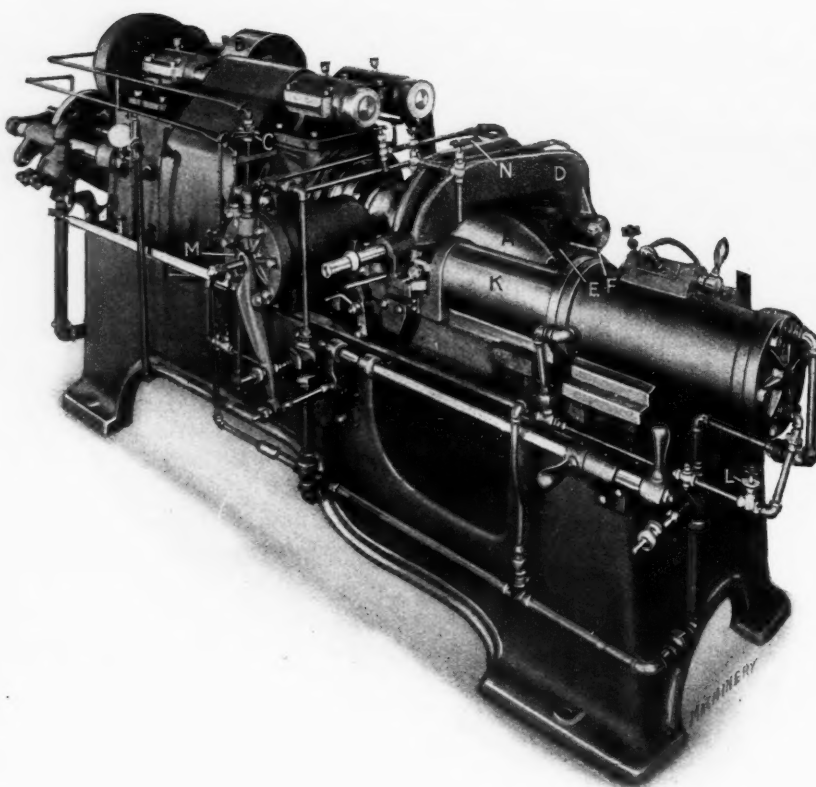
Partial End View of Warren "Hydraulic" Lathe for Large Shells
